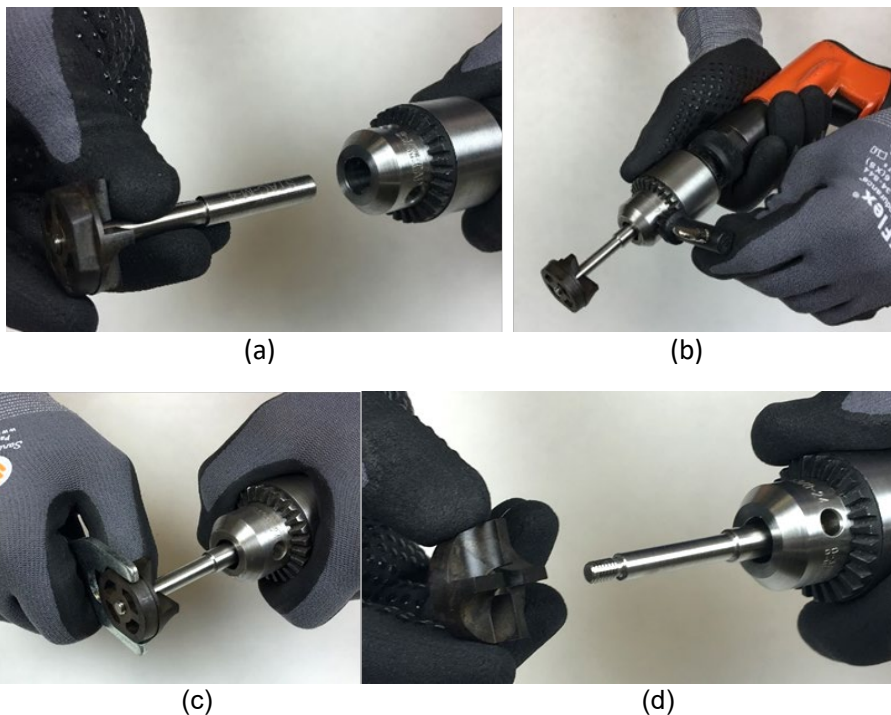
Removing Torlon Adhesive Cutters from the Standard Mandrel – Drill Motor
